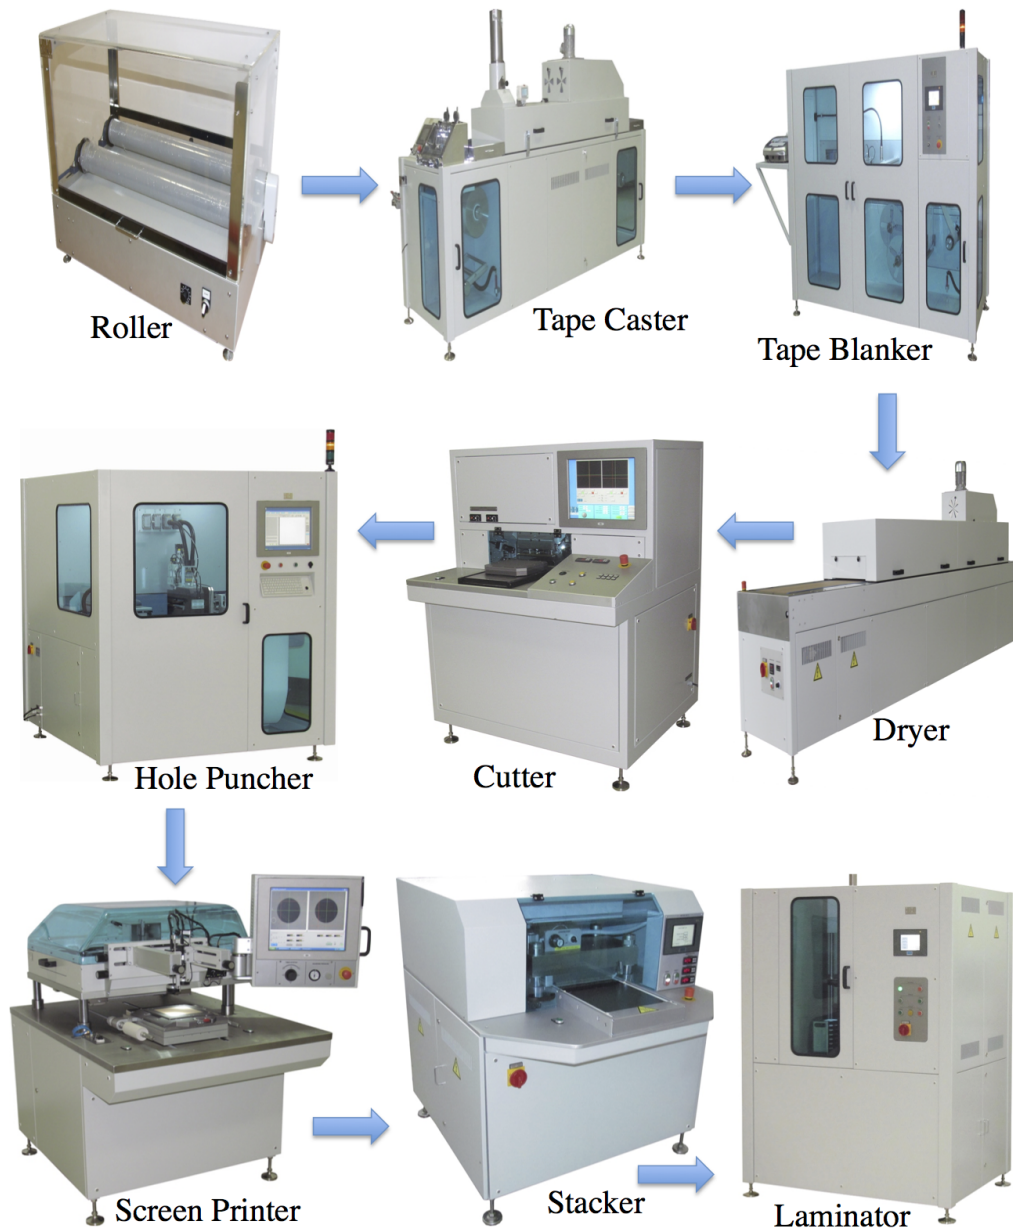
Traditional LTCC manufacturing equipment; images taken from Keko Equipment [3]
